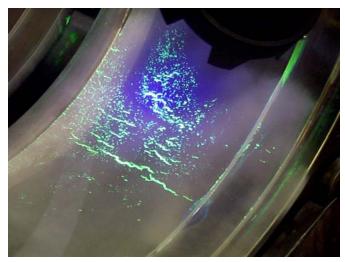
A fluorescent penetrant test reveals severe stress corrosion cracking in an 18Mn 5Cr alloy retaining ring.
